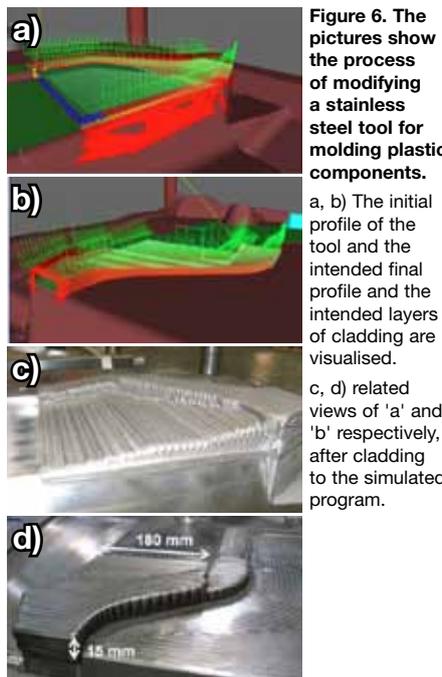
The pictures show the process of modifying a stainless steel tool for molding plastic components.
